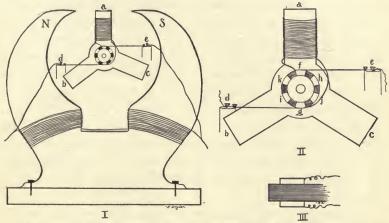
Diagram of a toy motor. I, sectional view of the motor; II, the armature enlarged; III, diagrammatic side view of commutator.
